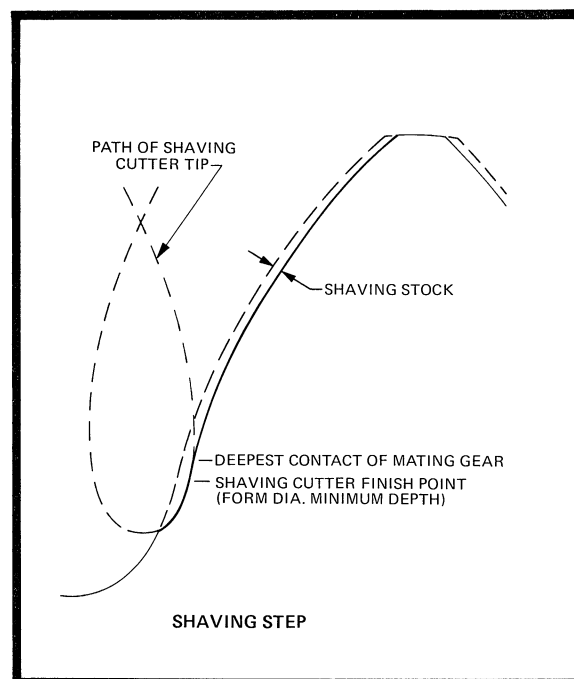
A step in the gear tooth flank will result if the profile in the vicinity of the fillet diameter is not relieved in any way.
